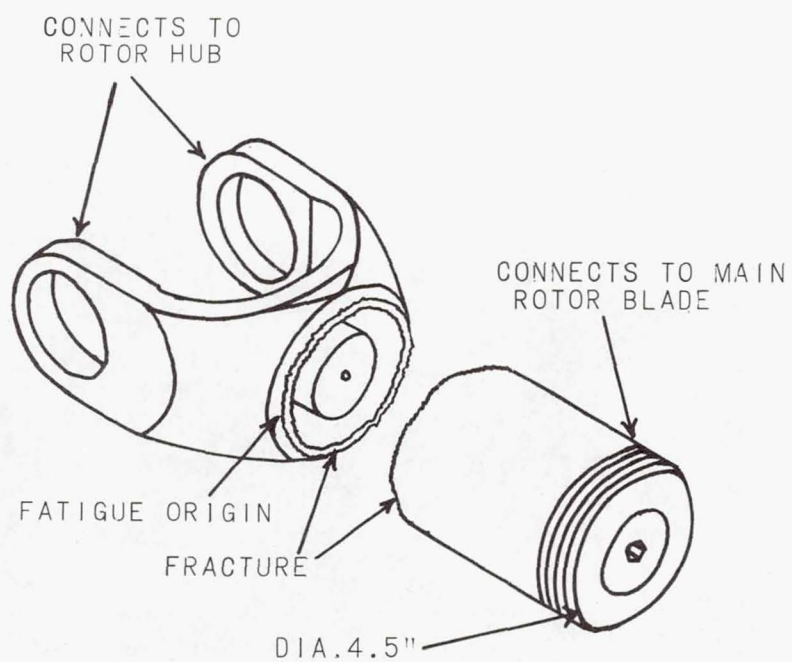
Drawing of the failed main rotor spindle, showing the location of the fracture.
